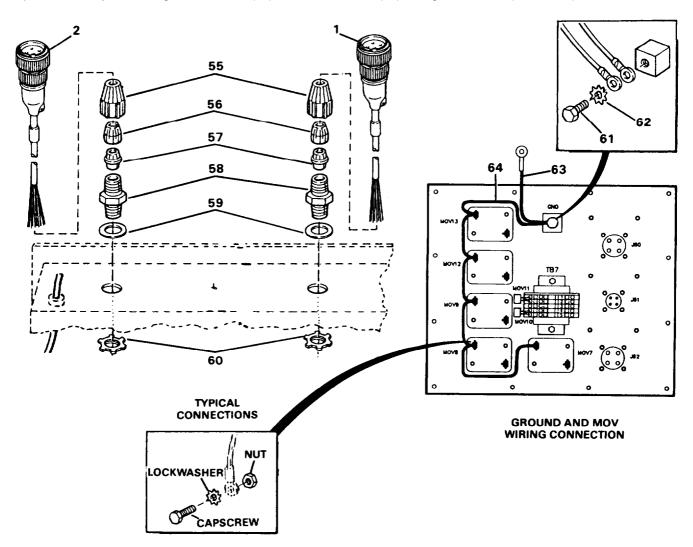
Distribution Pump External Electrical Panel Assembly (sheet 2 of 2)
